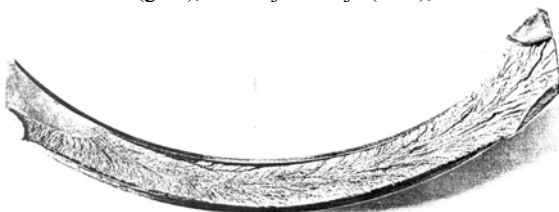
Second blade fracture started from a fatigue crack, /27/.
